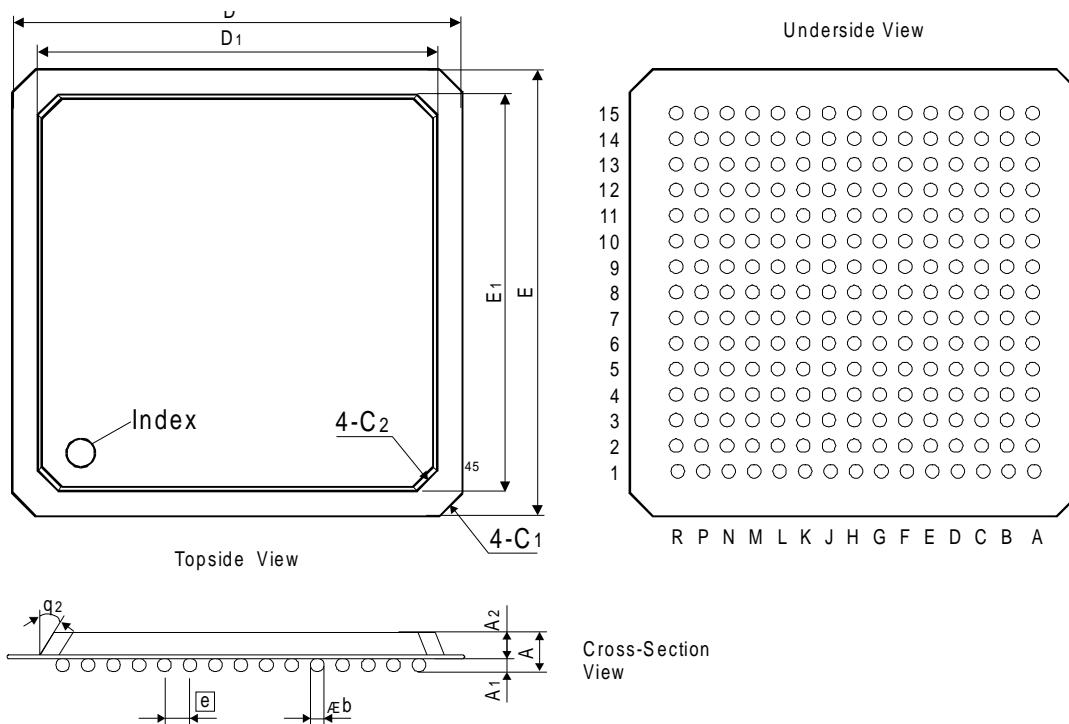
225-Pin PBGA Package Mechanical Dimensions
